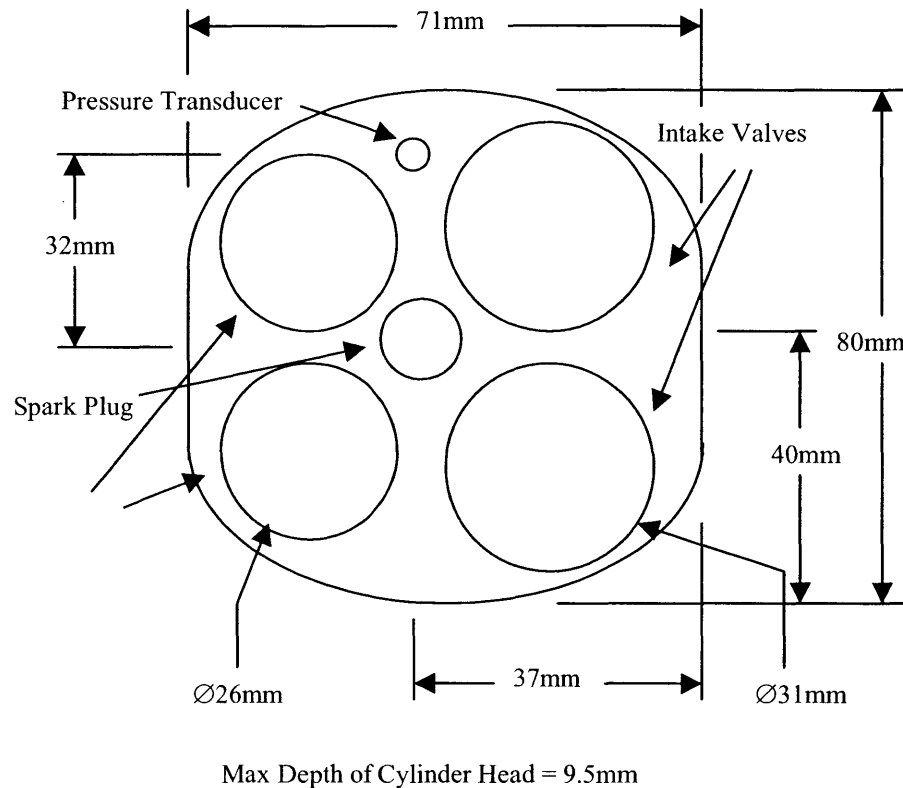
Engine Cylinder Head Diagram. The engine head is a shallow hemisphere design with four valves and a near-centered spark plug.
